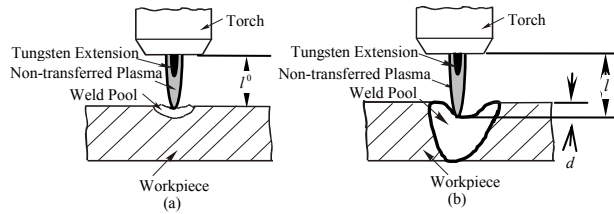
Monitoring of Weld Pool Surface. (a) Flat Reference Weld Pool; (b) Measured Weld Pool
